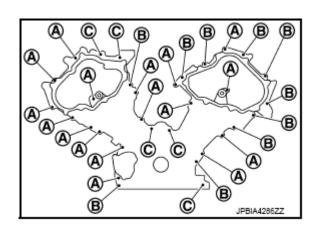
Identifying Front Cover Mounting Bolts Courtesy of NISSAN MOTOR CO., U.S.A.
